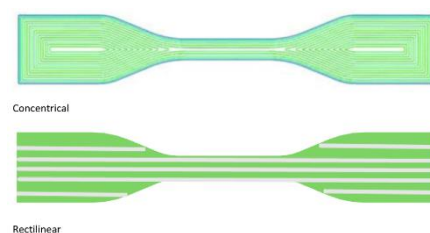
Tensile test specimens printed in two different fill patterns. Above printed specimen in concentric pattern. Below the specimen with rectilinear fill pattern.
